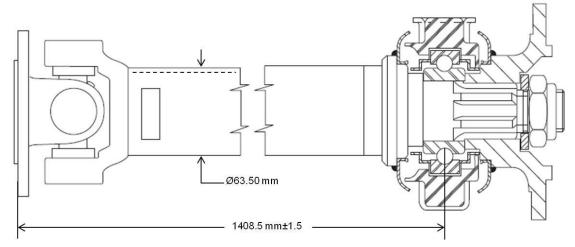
6x6 Shaft W-Centre Bearing – NIIN 66-128-5663 / LRA PNo: AYG7333
